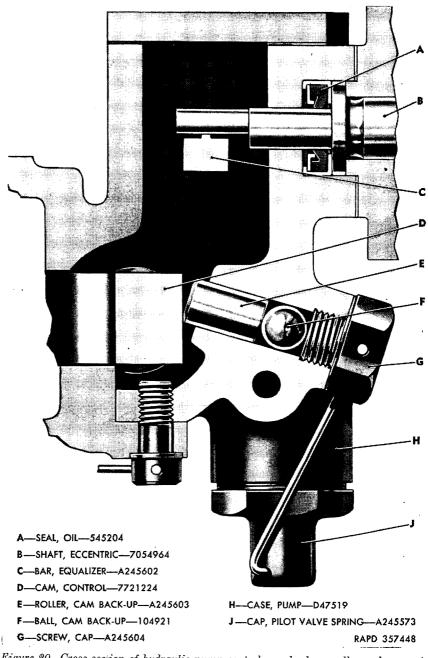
Cross section of hydraulic pump control cam back-up roller and eccentric control shaft.
